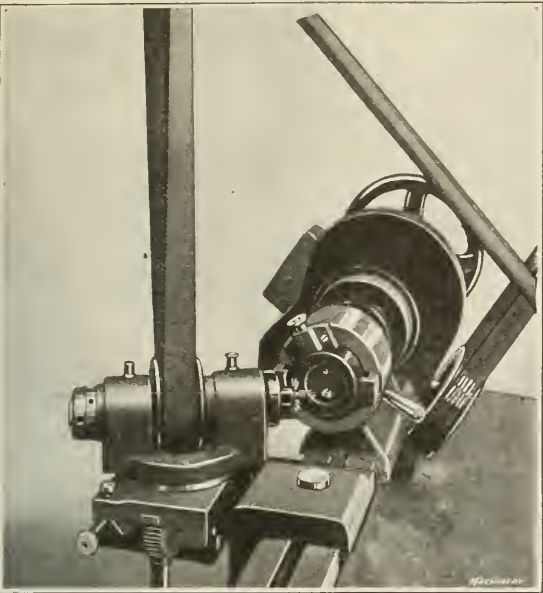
End View of Machine shown in Fig. 5 for roughing out Powder Train Groove
